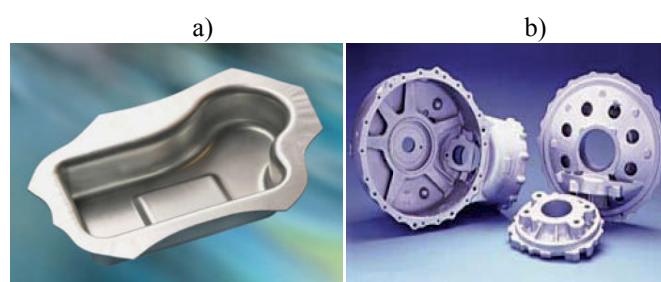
Elements made of magnesium alloys: a) by stamping, b) by casting
